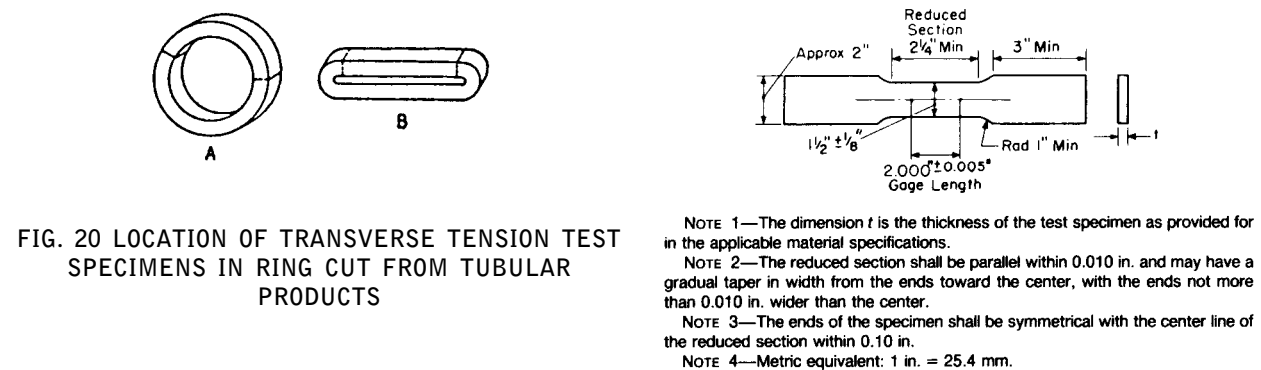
LOCATION OF TRANSVERSE TENSION TEST SPECIMENS IN RING CUT FROM TUBULAR PRODUCTS
